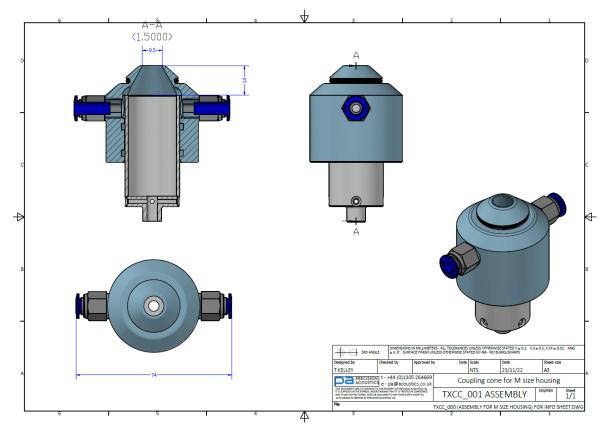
Coupling cone assembly (incl. transducer) for TXH-1-19 and TXH-5-19
